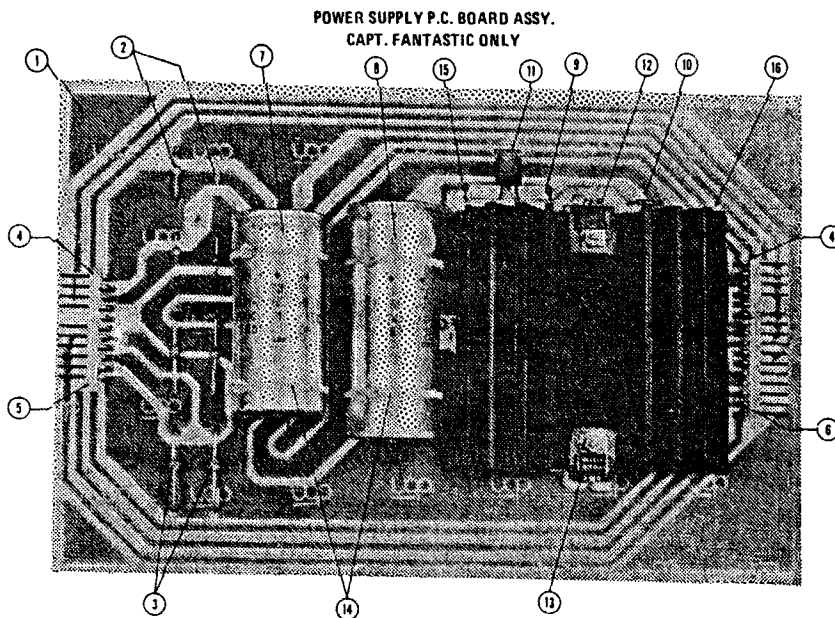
Captain Fantastic (614-00912) power supply and parts list.
